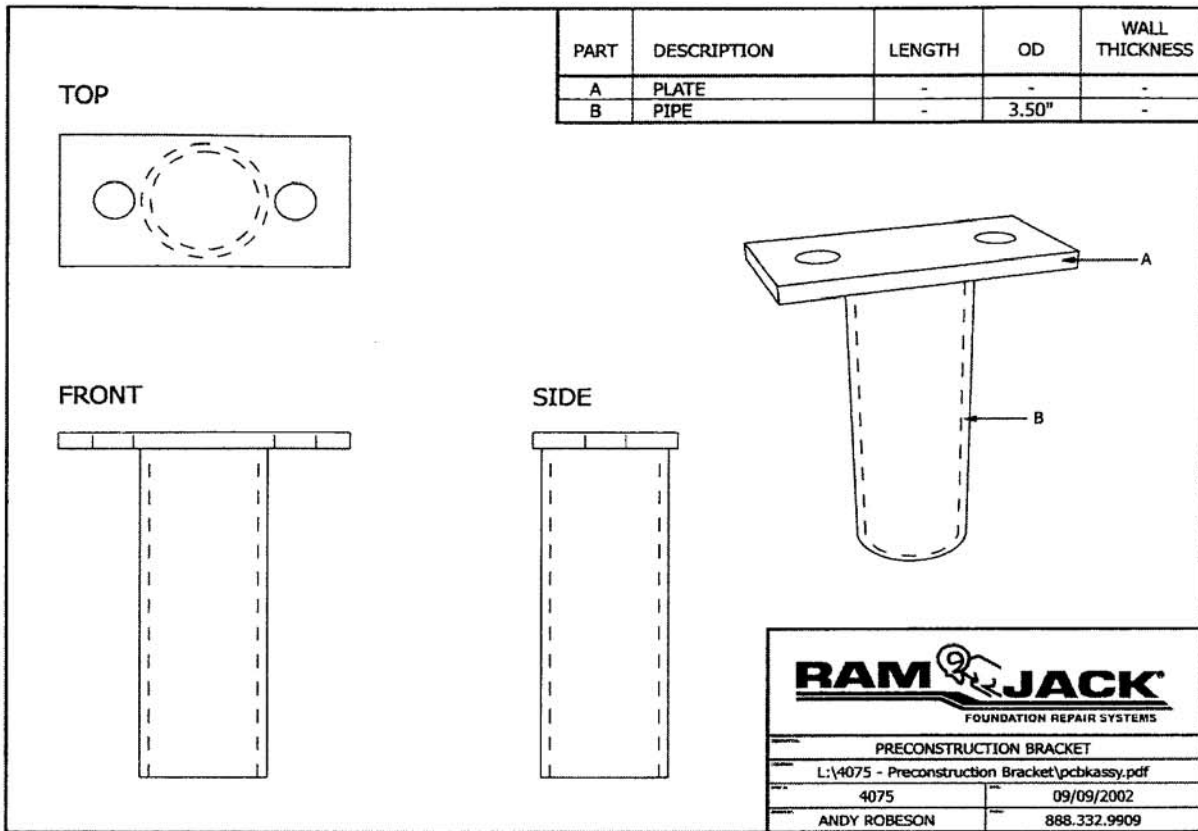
PRE-CONSTRUCTION BRACKET DETAIL
